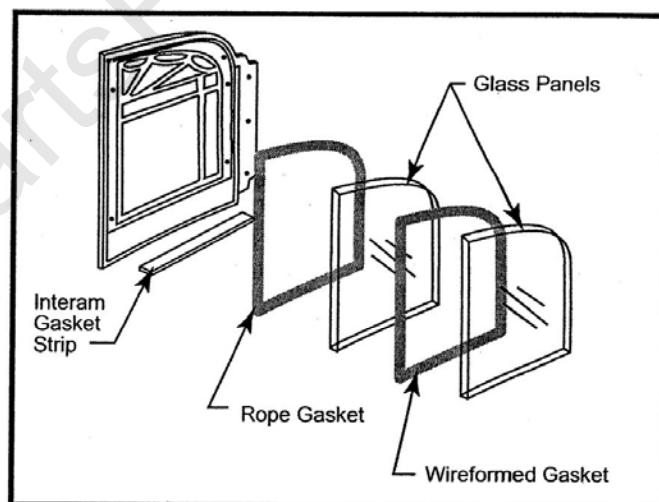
Glass gasket. 1986 - 91 unit shown; later units have only one pane of glass per door.
